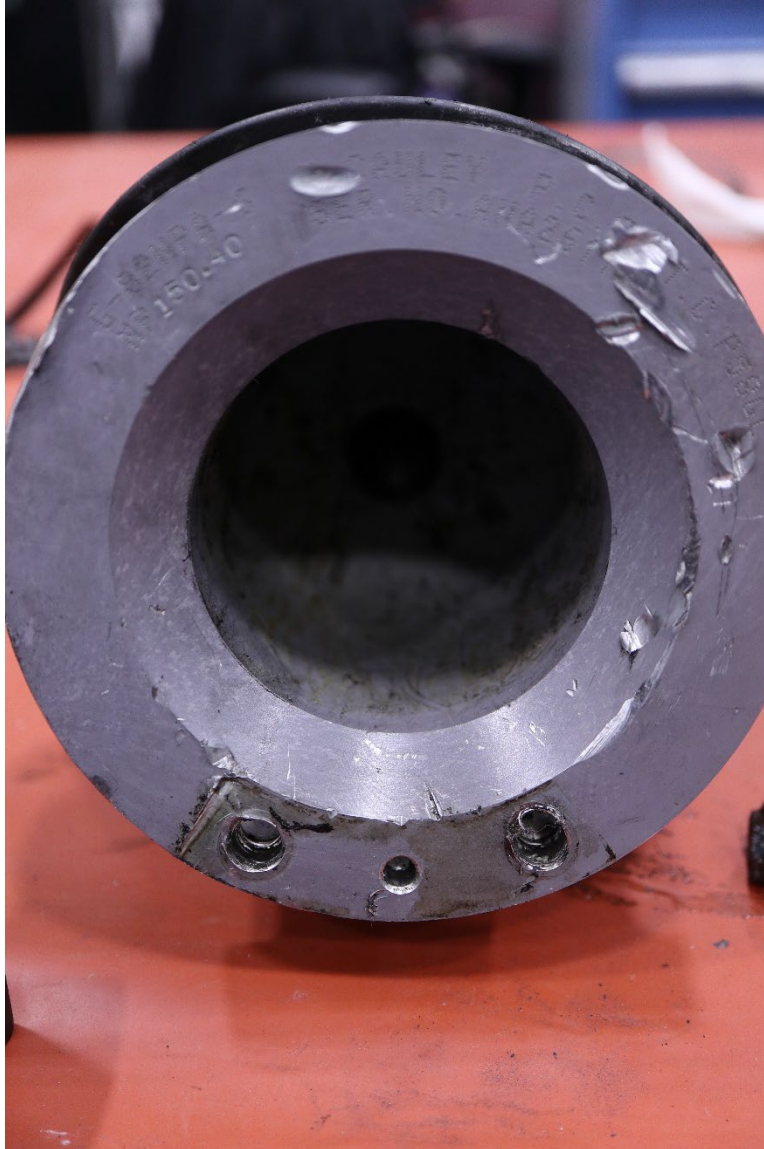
View of the Butt End of the No. 1 Propeller Blade. Note the Damaged Bolt Holes.
